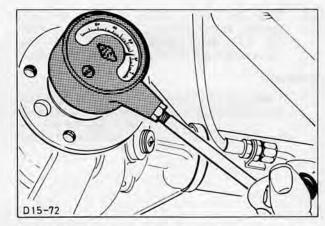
Check running torque of axle at drive pinion with special tool no. 15–041
